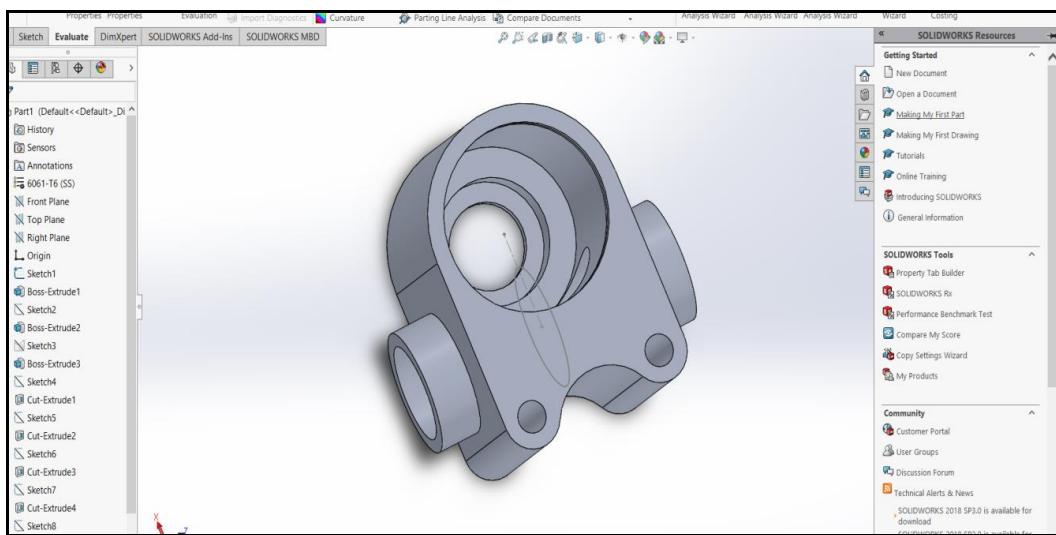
Cad model of Pinion casing in SOLIDWORKS
